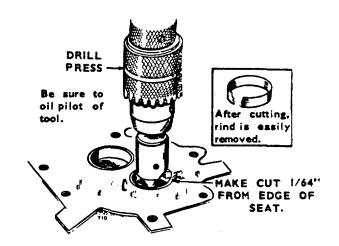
E-12. Removing Valve Seats Thoroughly clean the valve seat counterbore and remove any burrs from the edges. If the counterbore is damaged, it
